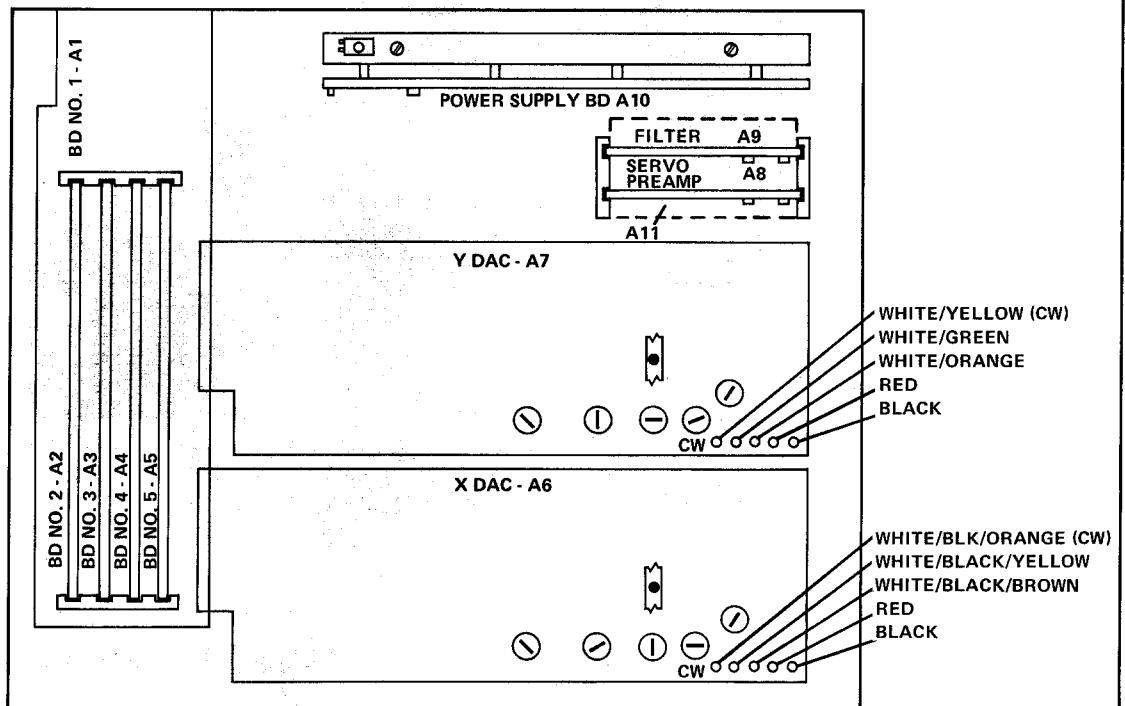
PRINTED CIRCUIT BOARD LOCATIONS
